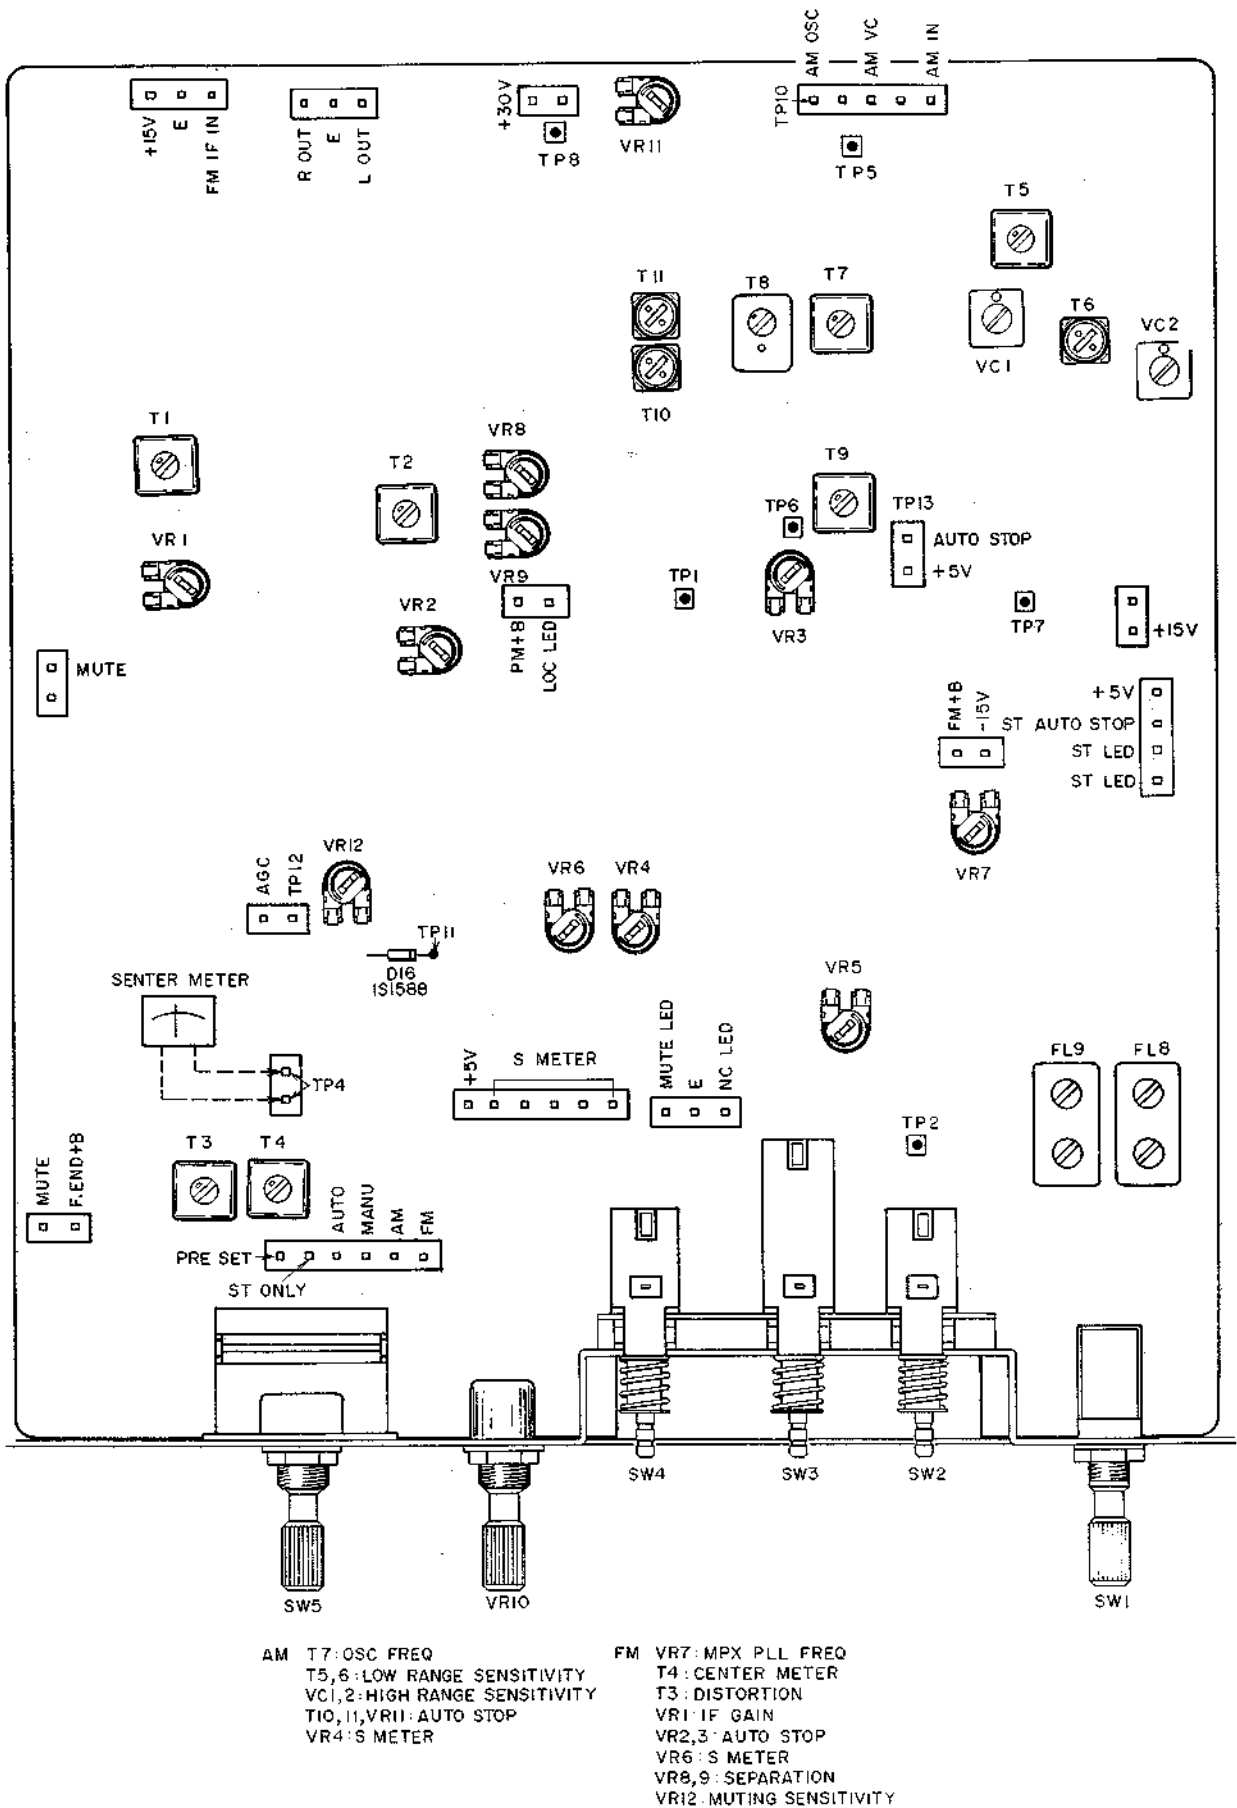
Tuner P.C Board (ATS-8001A)
